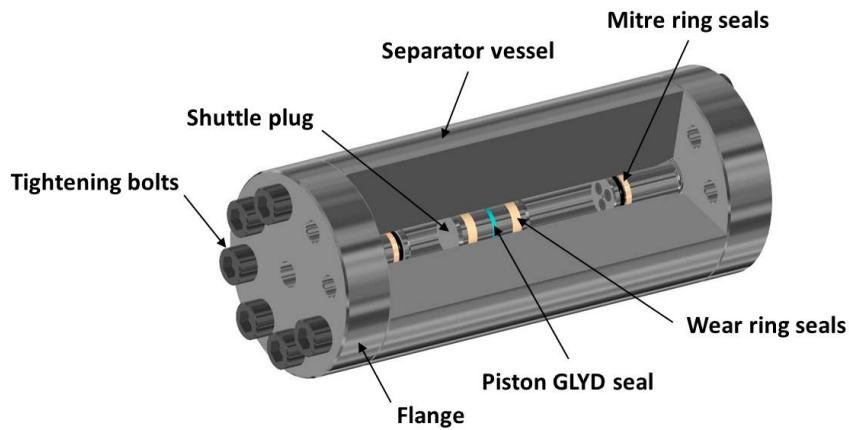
3D cut-away section showing the main separator components (courtesy of N. Hughes)
